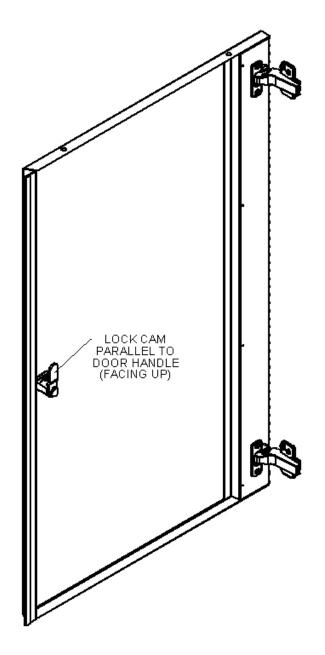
DOOR OUTER PANEL: INSTALLED INSET HINGE IC LOCK WITH OFFSET SPRING CLIP CAM-ANSET HINGE #6-32 X 3/8" PHILLIPS PAN HEAD SHEET METAL SCREW
